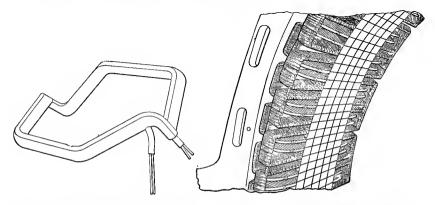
Machine-formed coil for alternator armature, bent to permit overlapping.
